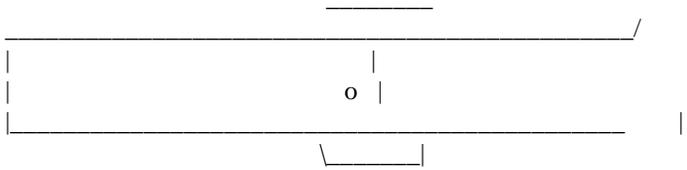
pipe with one end flattened and fuse hole drilled (top view)
